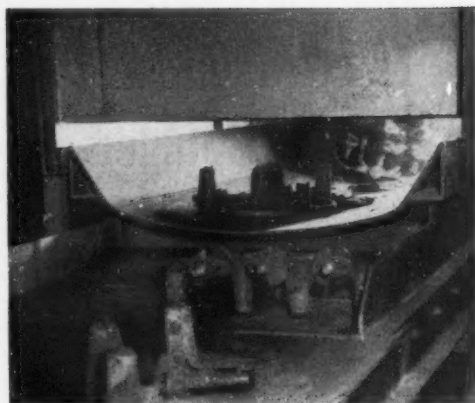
Cooled Castings are Shaken Out of the Moulds on this Oscillating Conveyor. The Sand is Collected and Used Again for Backing-up
